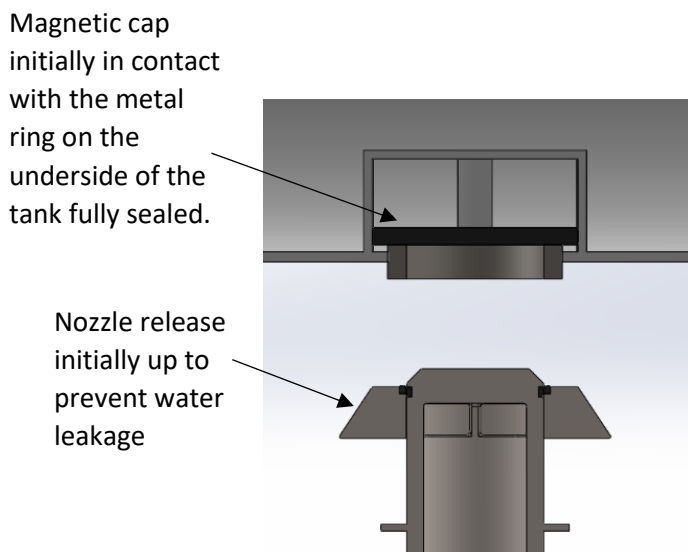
View of the connection inside the tank before contacting the nozzle
